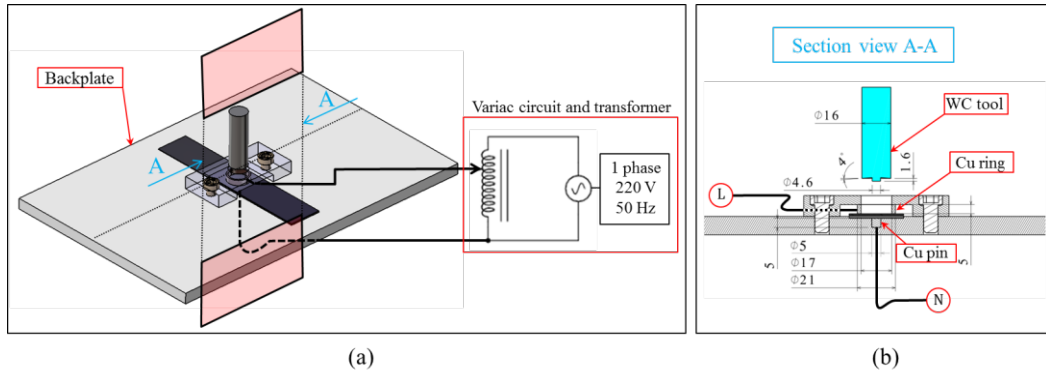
(a) Schema of the electrically-assisted equipment and (b) longitude section with dimensions (mm)
